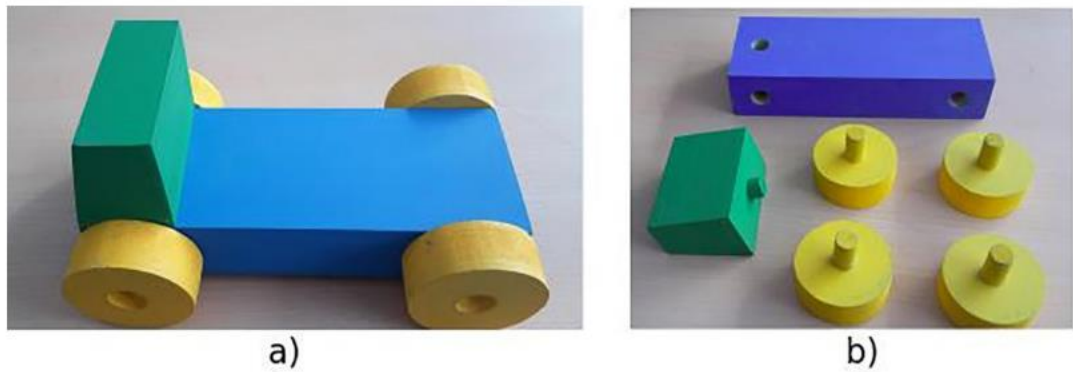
a) Car to be assembled. b) Parts to be assembled [9].
